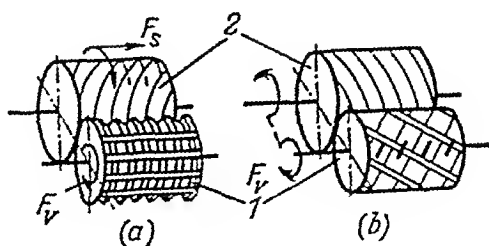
Examples in which the shape and size of the cutting tool affect the operative motions in thread milling
